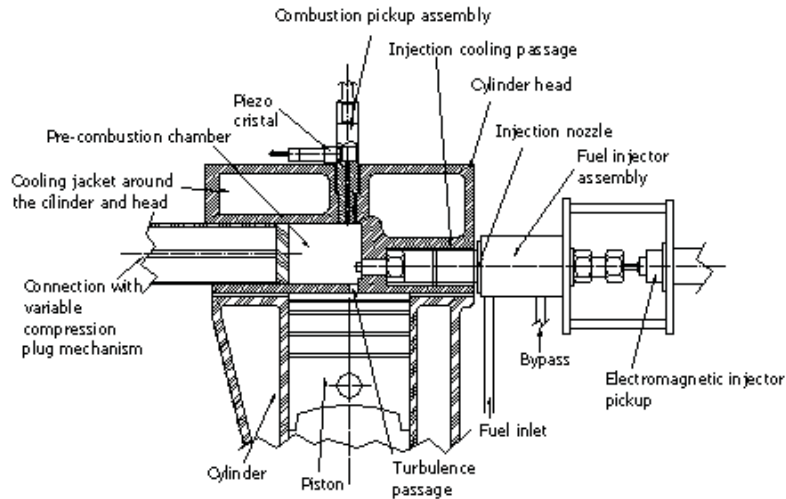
CFR F-5 Diesel Combustion Chamber Assembly
